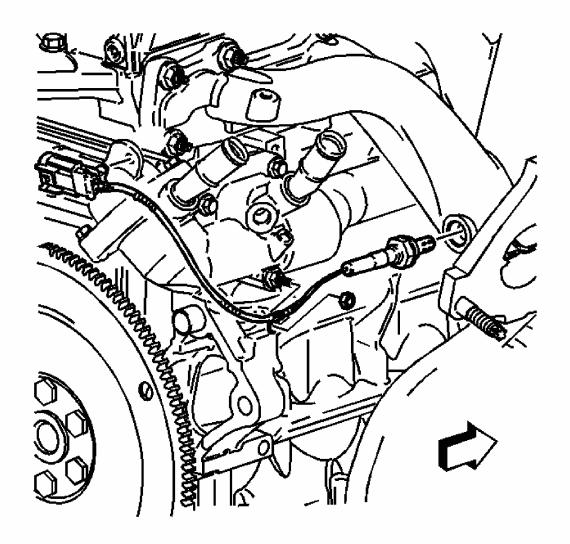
Oxygen Sensor & Harness Connector Courtesy of GENERAL MOTORS CORP.
